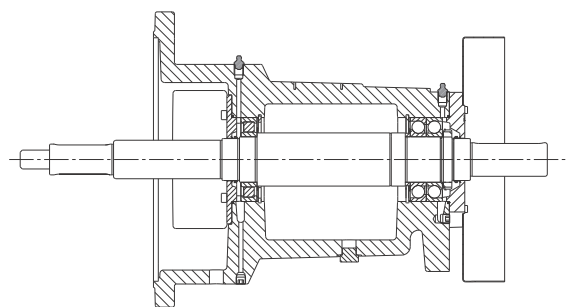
Bearing bracket with open roller bearing and double angular contact bearing lubricated via grease nipples
